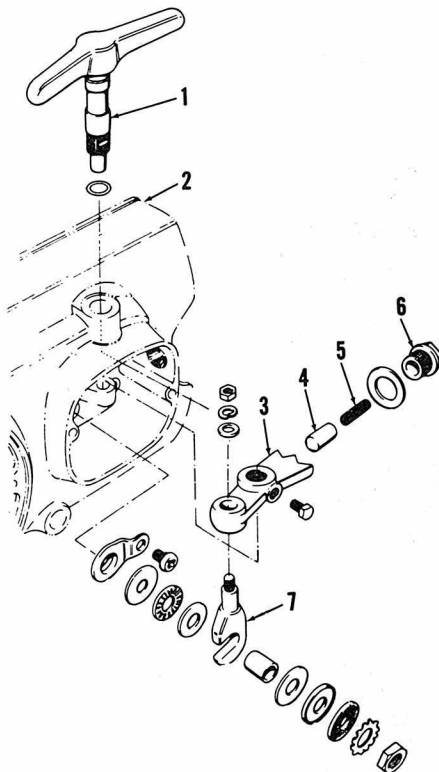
Exploded view of reduction shifter assembly used on TC120 models.
